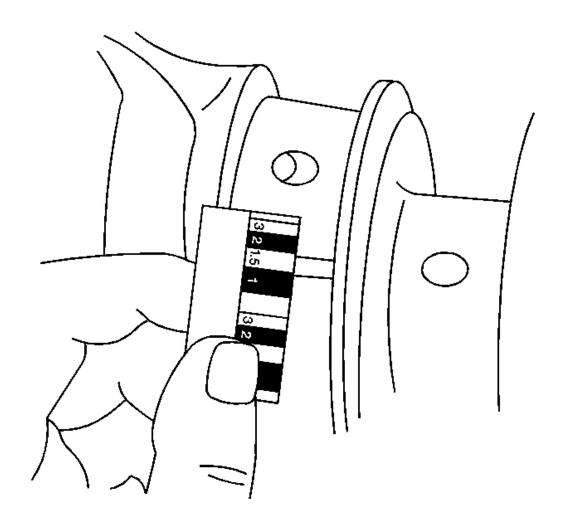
Measuring Gaging Plastic Courtesy of GENERAL MOTORS CORP.
